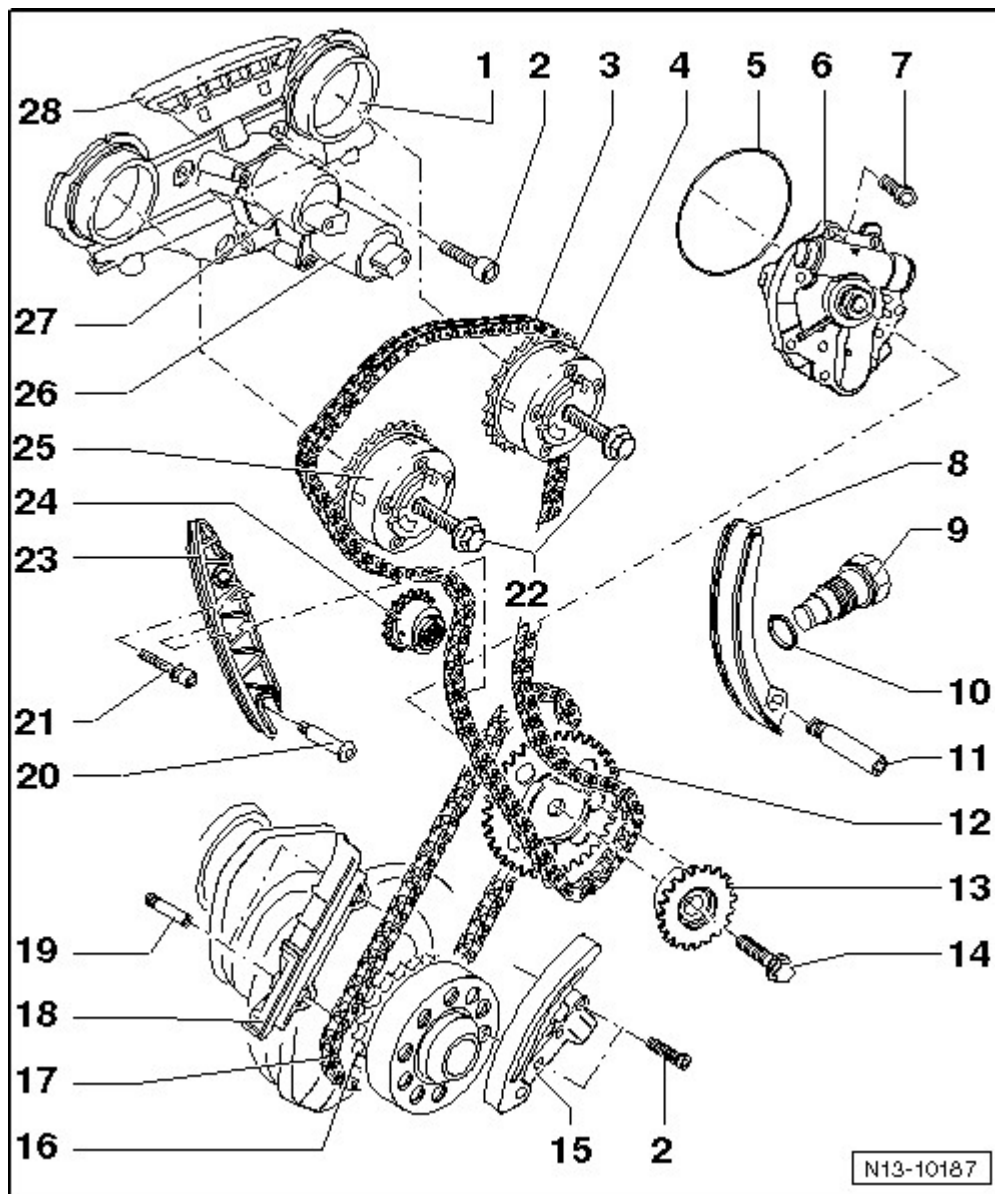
Identifying Engine, Disassembling And Assembling Part I
